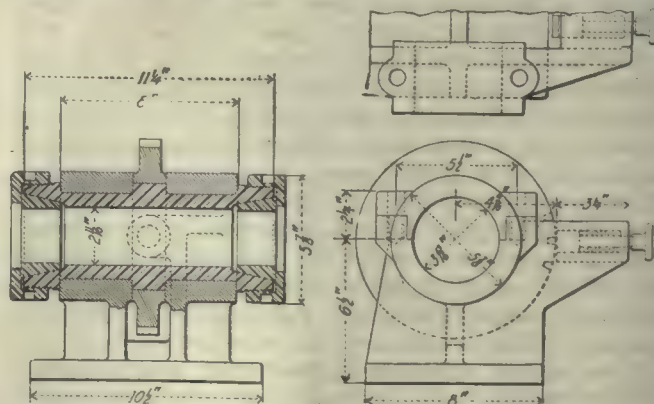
DETAILS OF HOLLOW-SPINDLE DIVIDING HEAD
